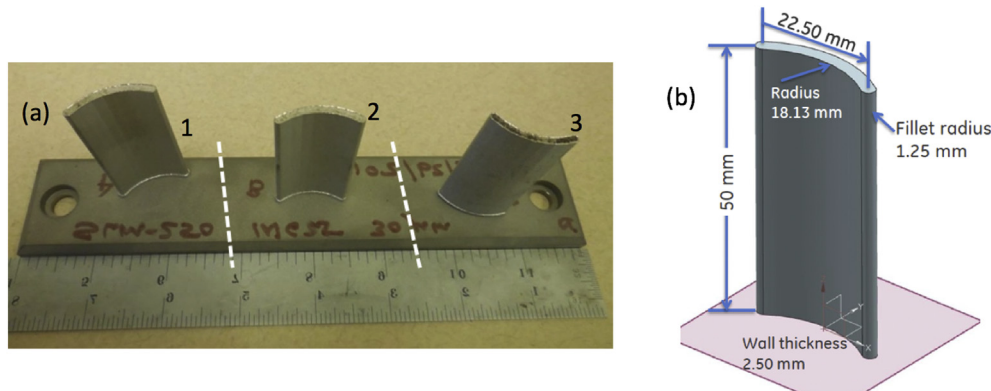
Three as-built parts, 1, 2 and 3, on the build plate (a) and their design dimensions (b).
